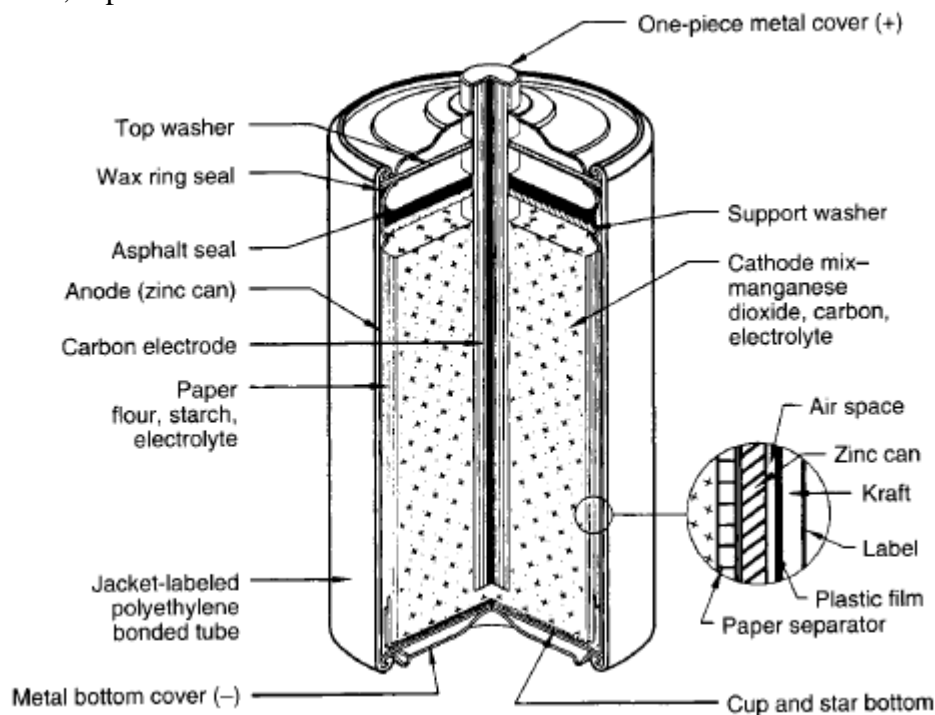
Typical cutaway view of cylindrical Leclanche' battery ('Eveready') paper liner separator, asphalt seal.
